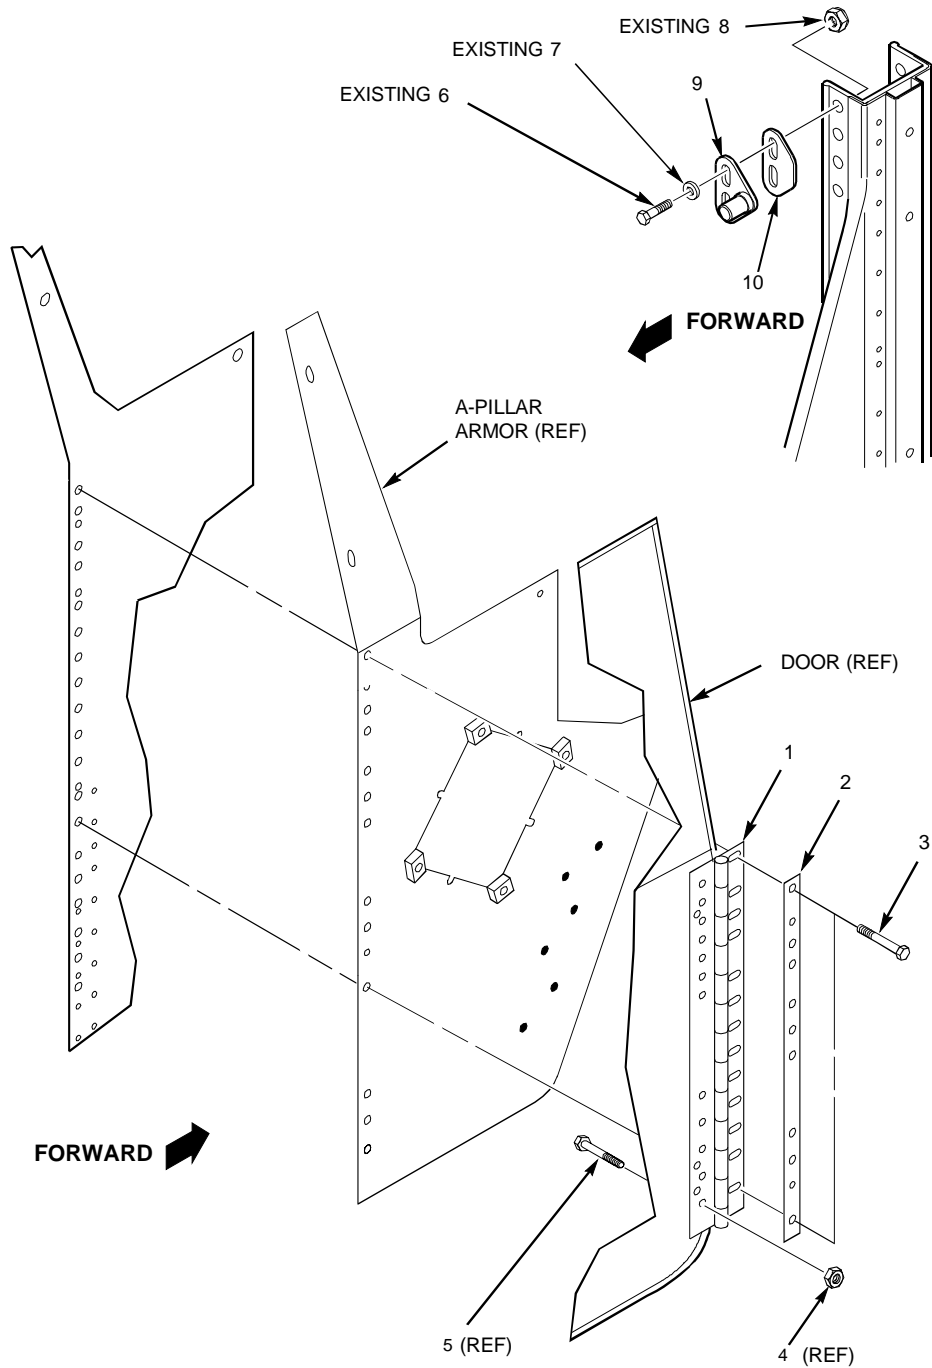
Right Front Door Striker Removal (2 and 4 Door)
